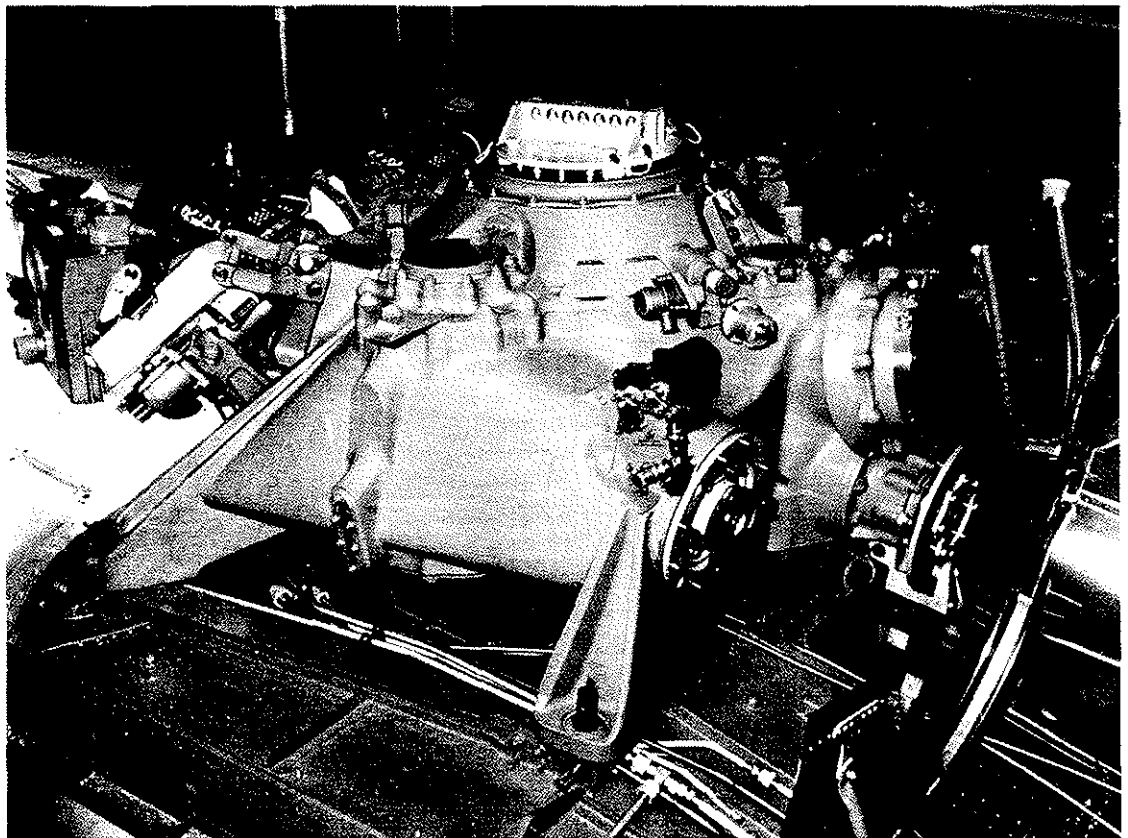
LYNX GEARBOX VIEWED FROM PORT SIDE
